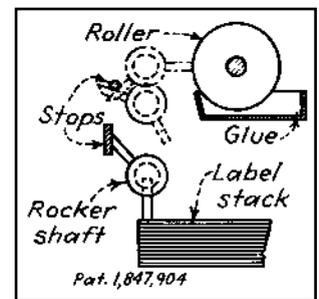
A rocker shaft on a rack, which is moved vertically by a sector gear, carries glue on a contact bar from the roll to the label stack.
